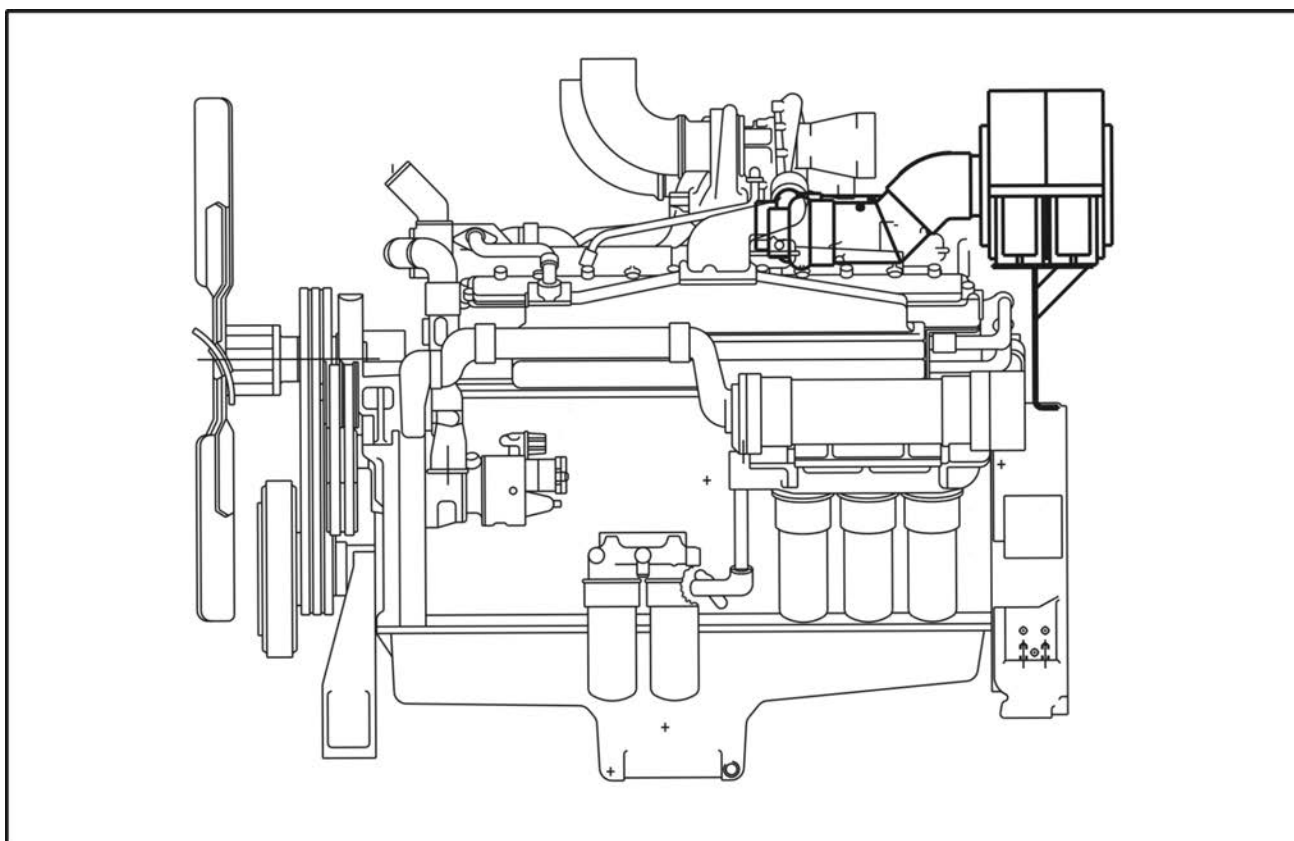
NORMAL AIR CLEANER ASSEMBLY
